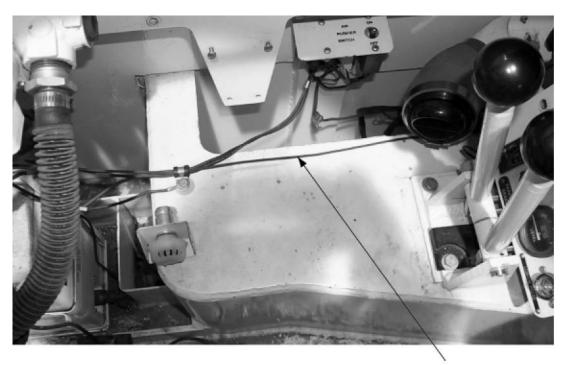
HDC Power Cable Assembly W1 Connection to Parking Brake Relay
